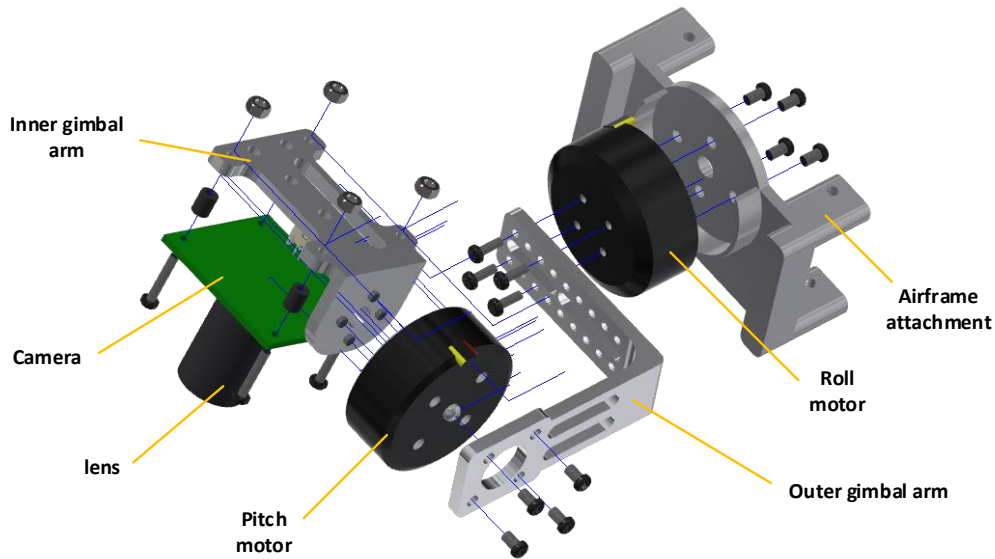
Exploded CAD diagram of the motorised gimbal construction, annotated with the key assembly parts.
